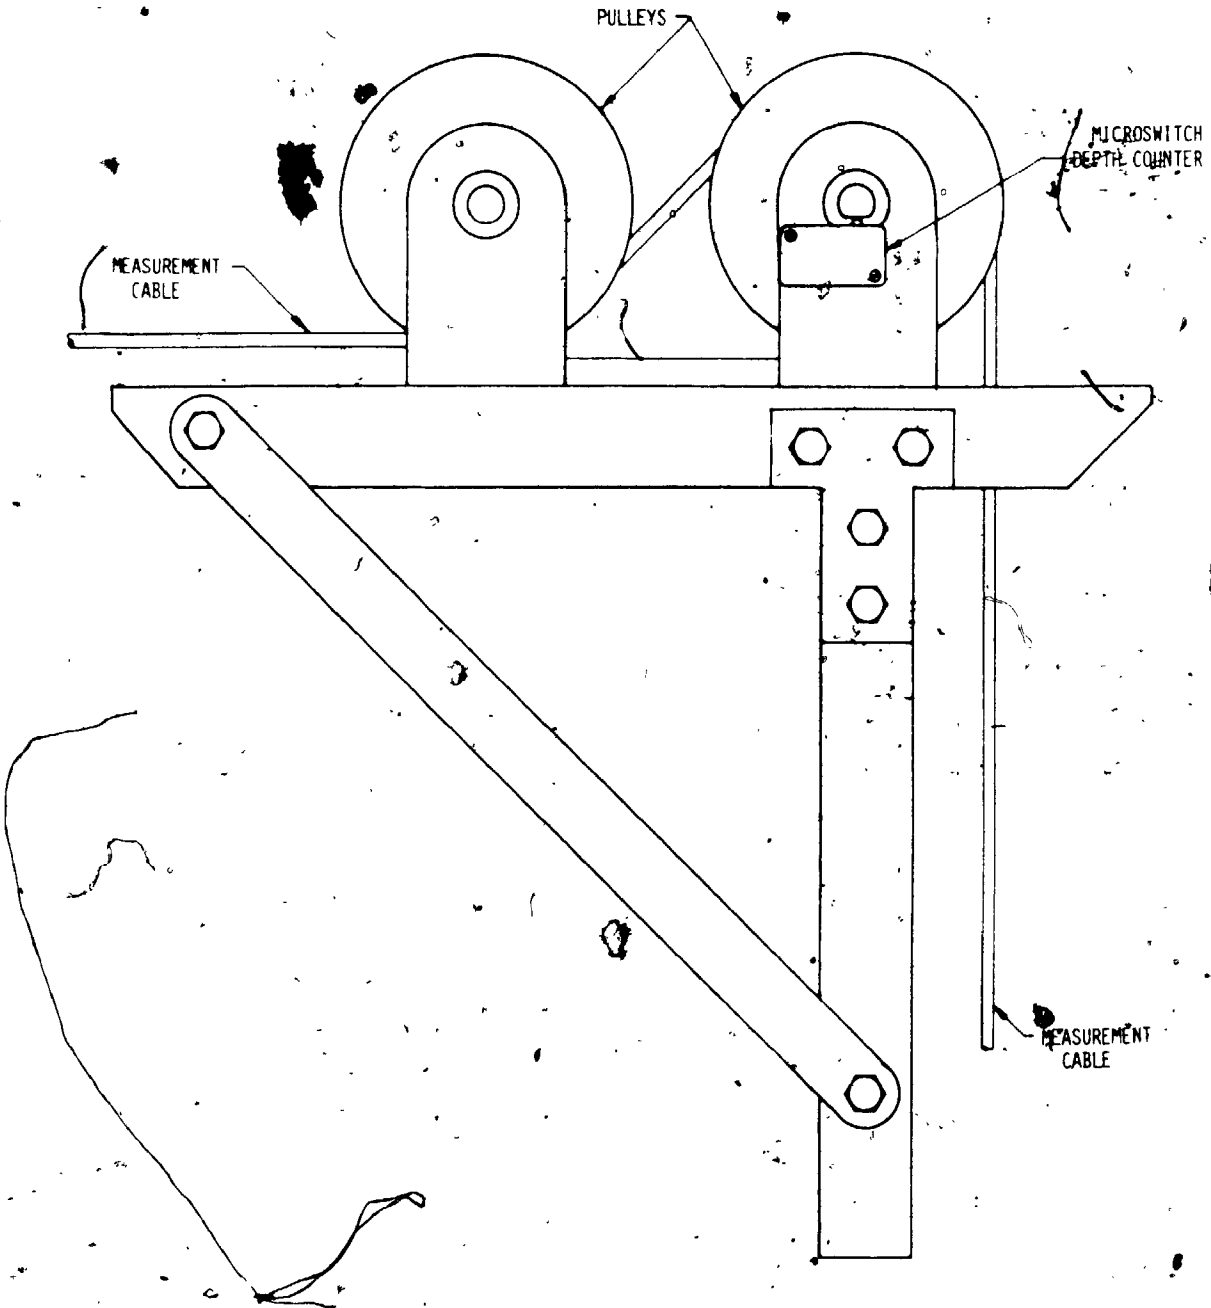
Well-head pulley assembly with micro-switch depth indicator. Not shown is a mechanical visual depth counter on the opposite side of the assembly.
